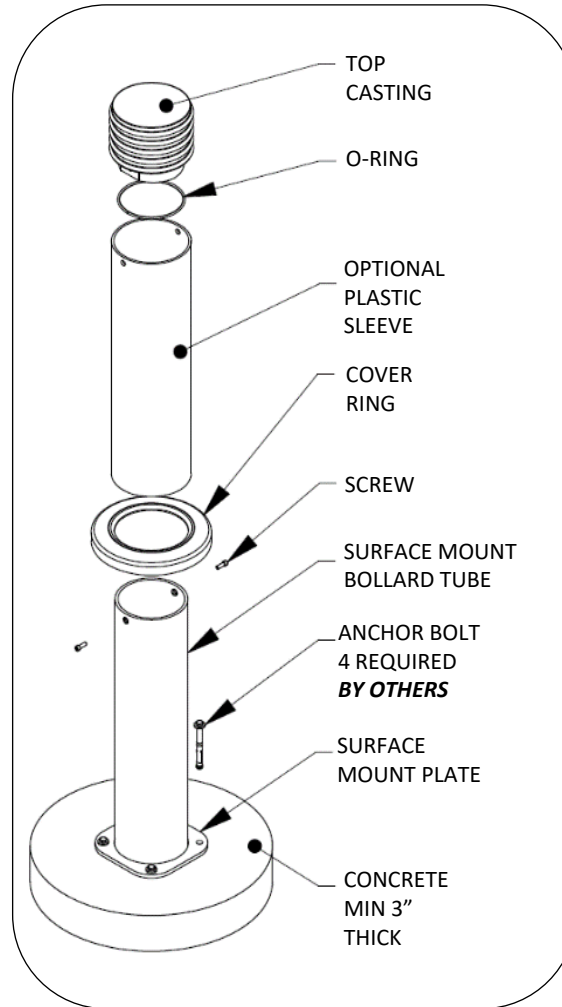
SURFACE MOUNT BOLLARD ASSEMBLY
